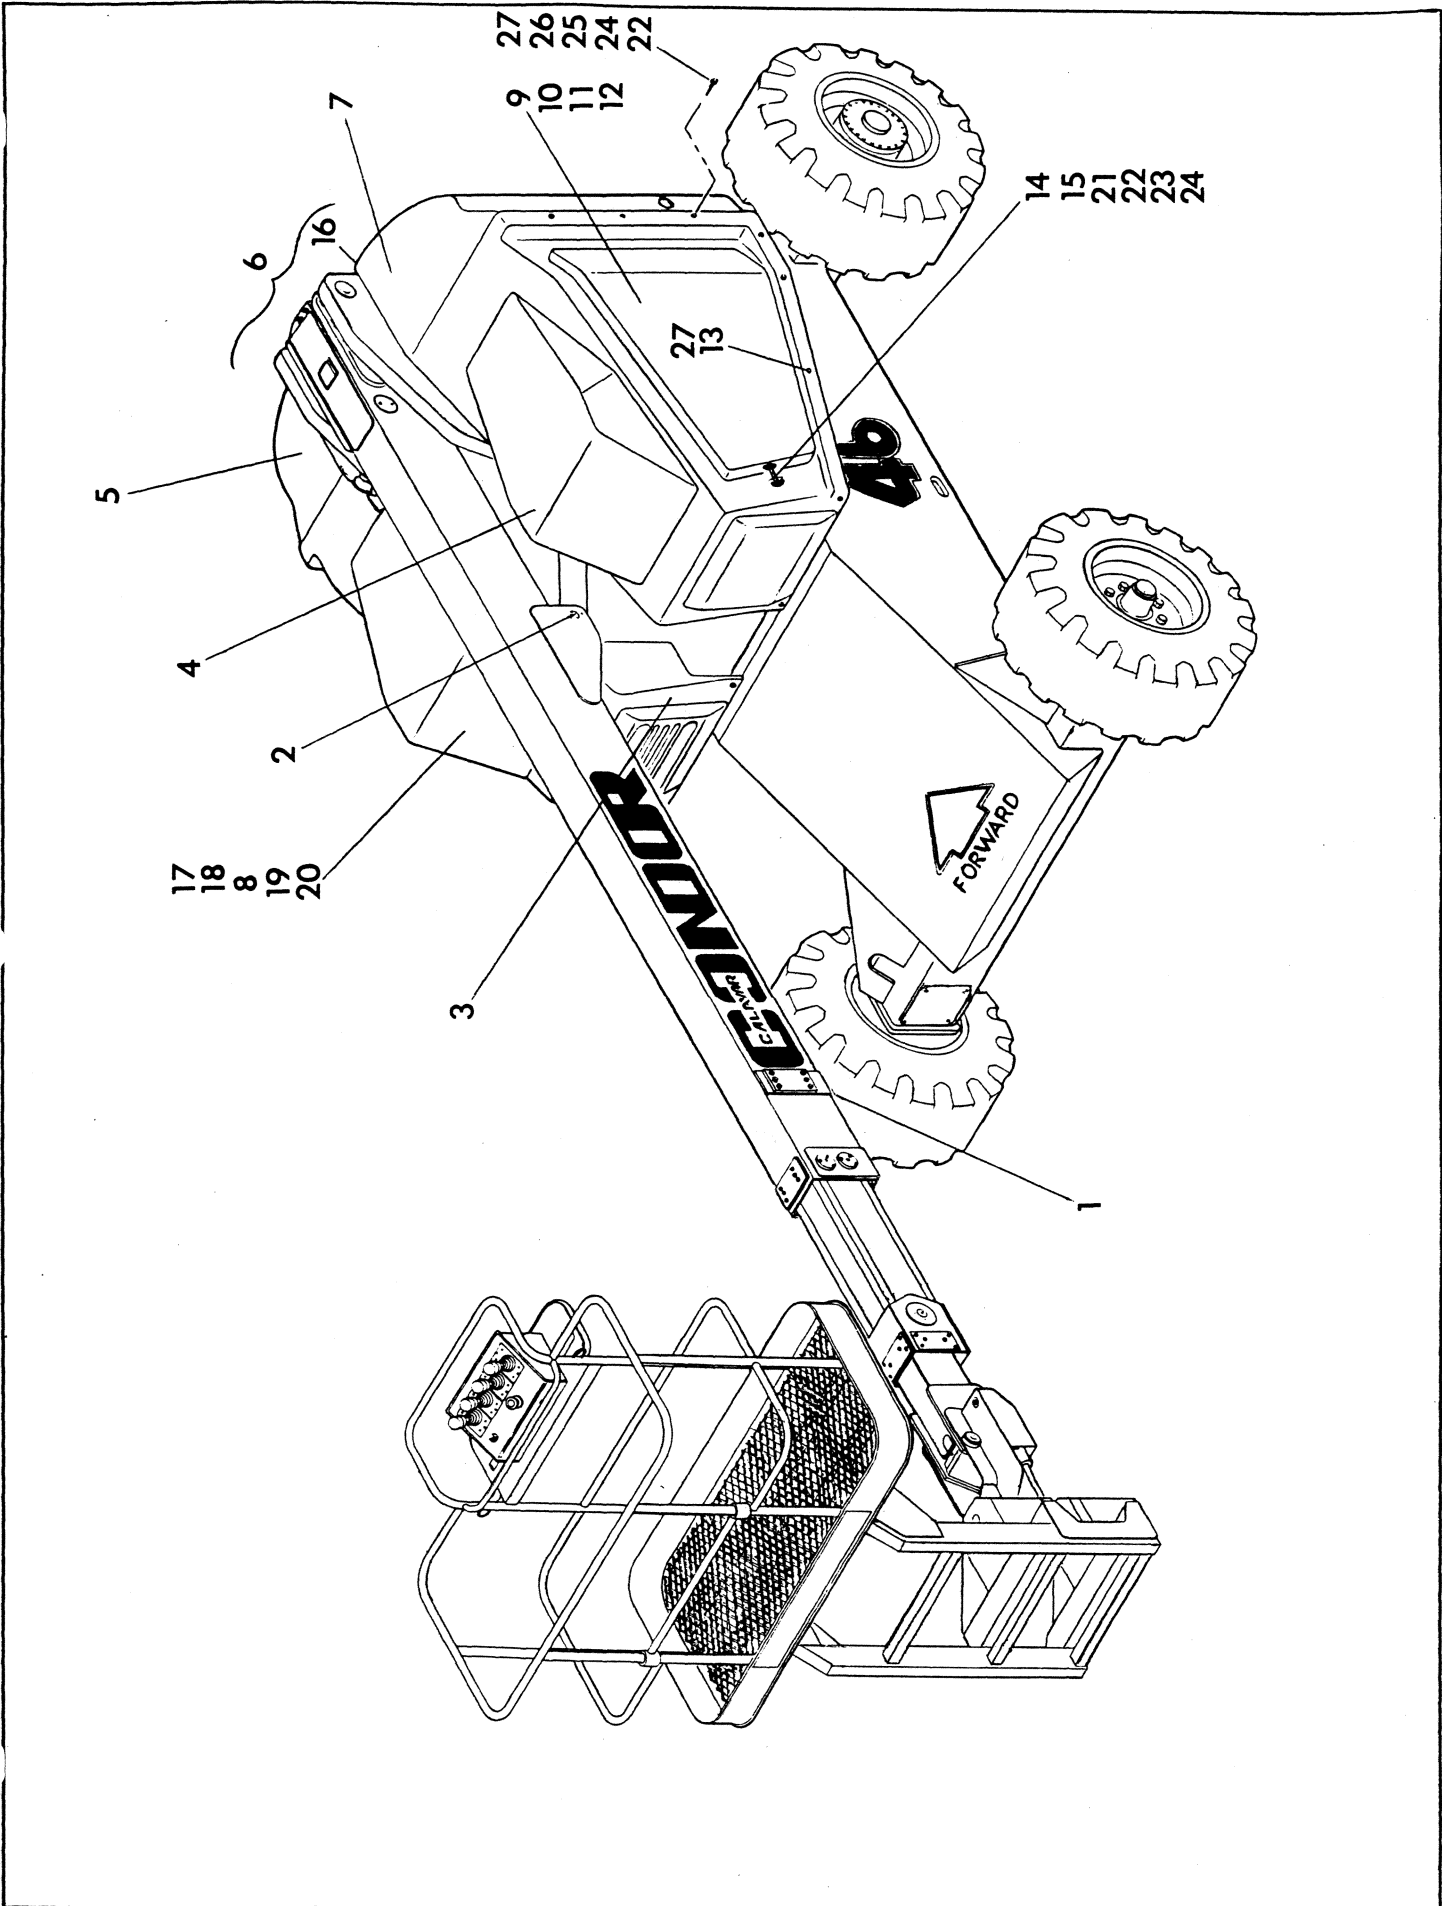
FINAL ASSEMBLY (3-Section Boom)
